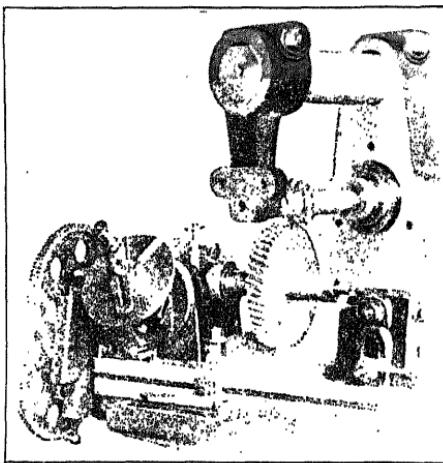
Milling twisted or helical teeth. Kempsmith Mfg. Co., Milwaukee.
